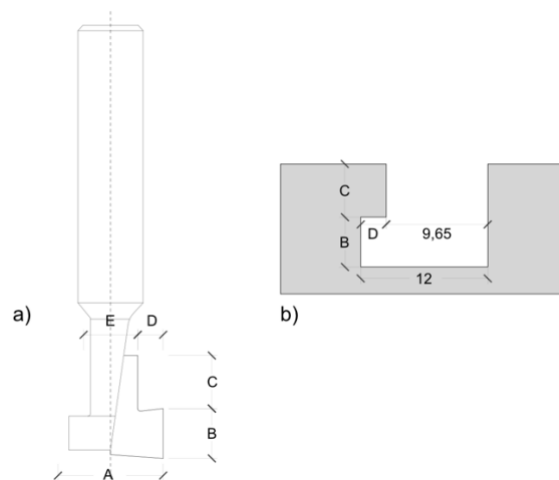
1) T-slot bit parts: A) Head diameter - 9,7mm (B) Head height - 4,6mm (C) Neck height - 4,9mm (D) Overhang - 2,35mm (E) Neck diameter - 5mm; b) Modified T-slot groove for flatbed CNC
